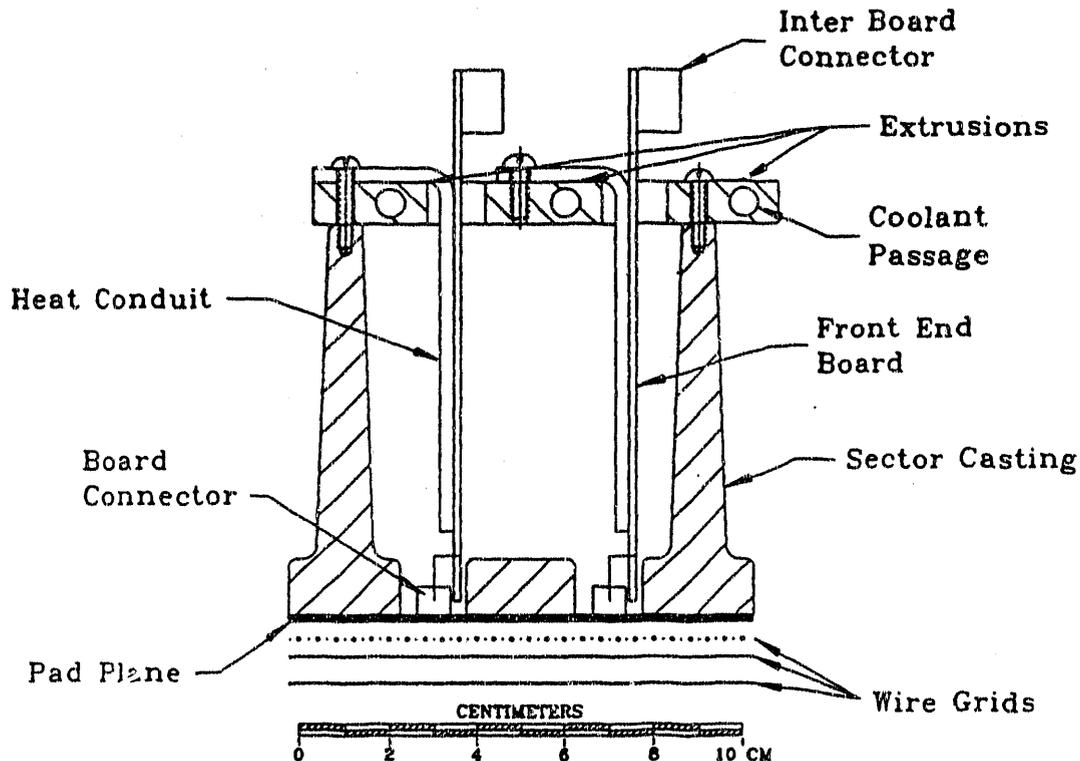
C-42 Cooling of the front-end electronics cards using heat conduits to a cold plate which contains extrusions with internal coolant passages.
